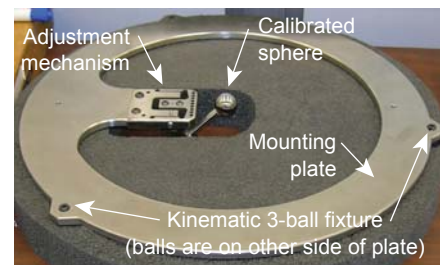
Master ball fixture used to calibrate the two measurement probes on PrISMM.
